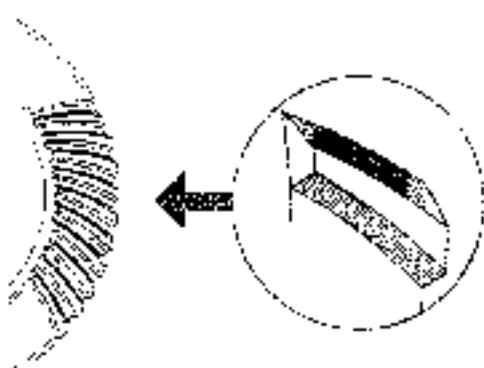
Bevel pinion and gear correct tooth bearing.
